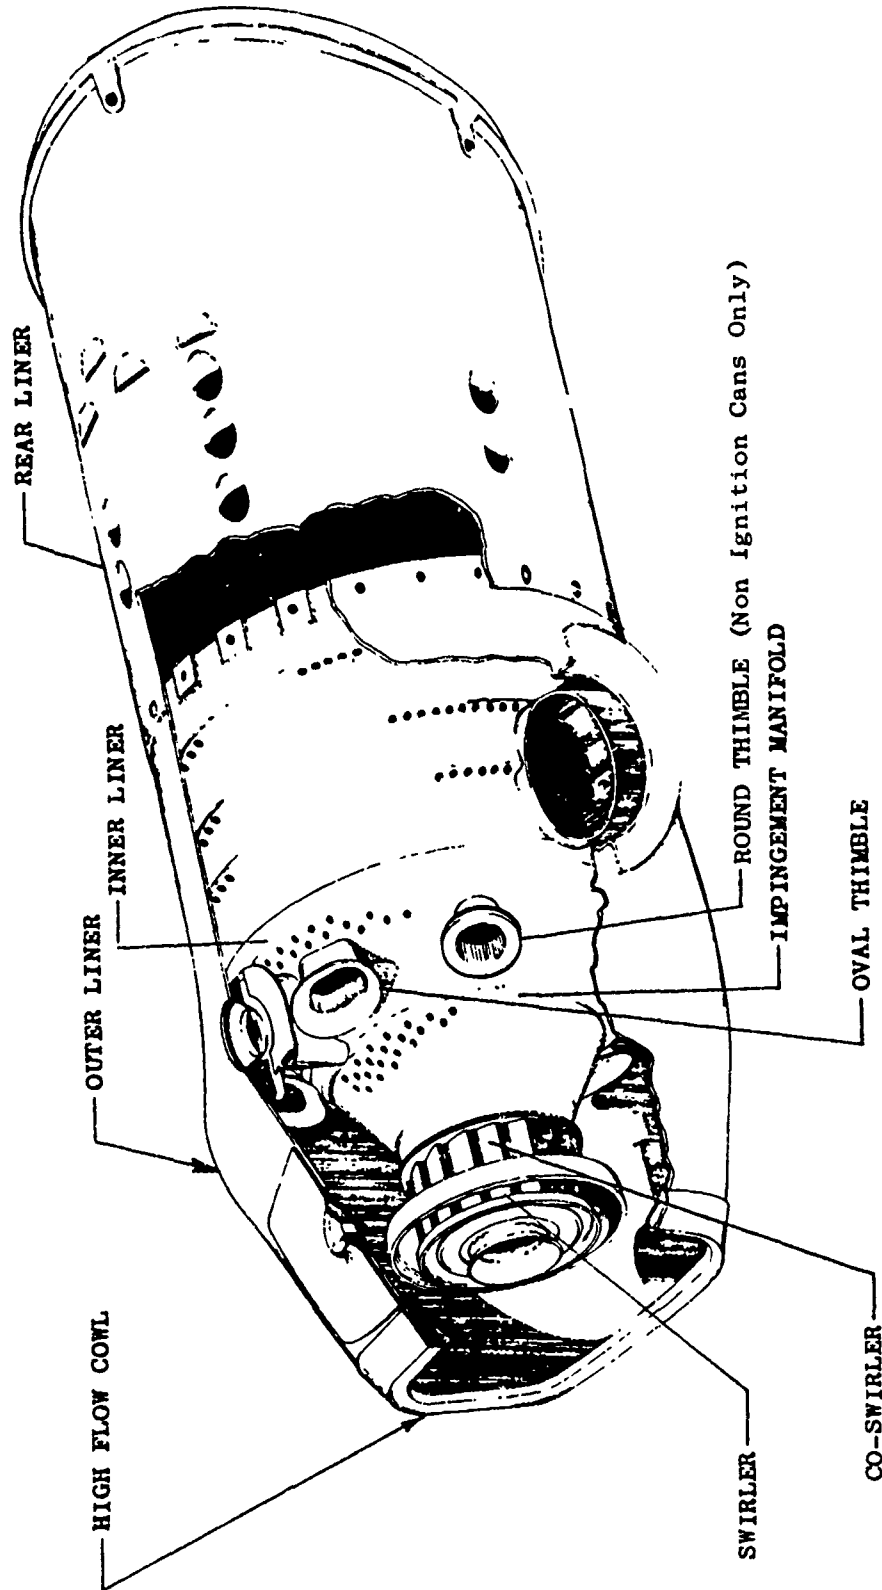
J79-17C Low Smoke, Long Life Combustor Assembly.
